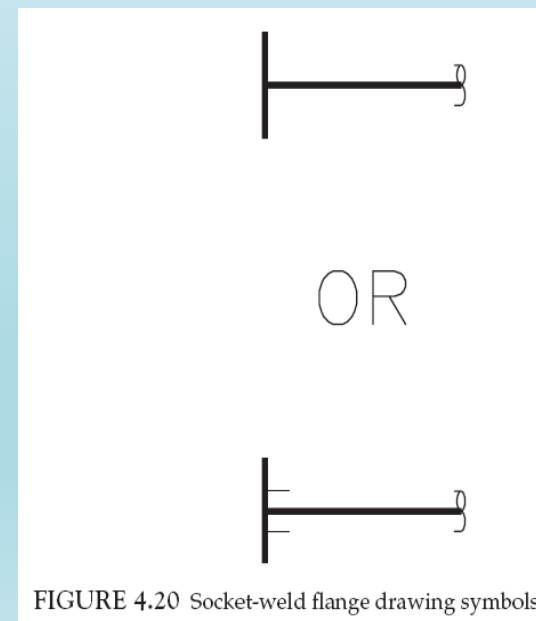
Socket-weld flange drawing symbols.
